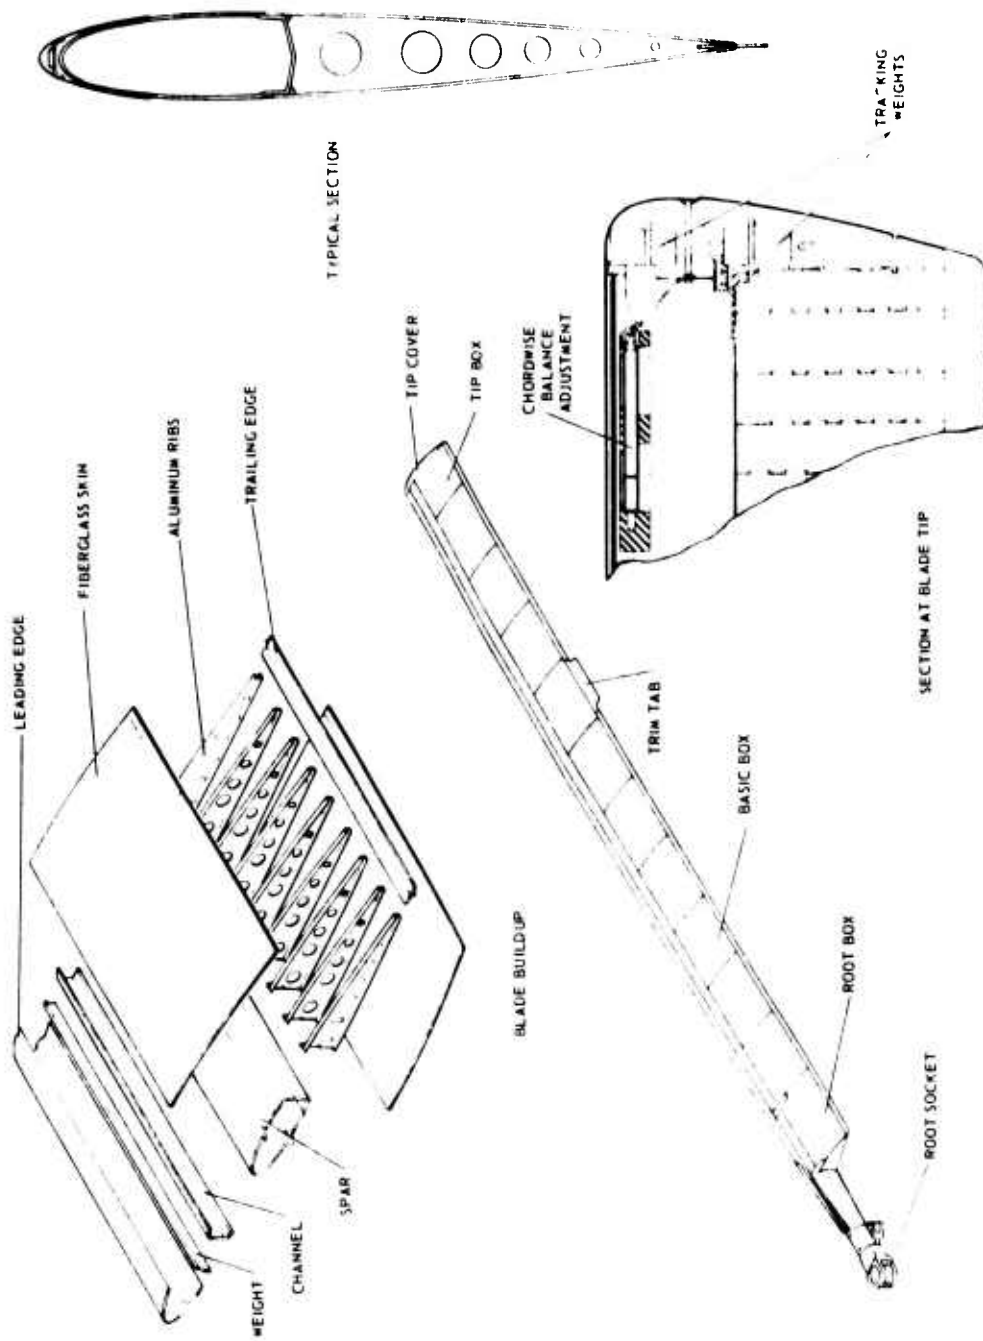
CH-47A ROTOR BLADE ASSEMBLY.
